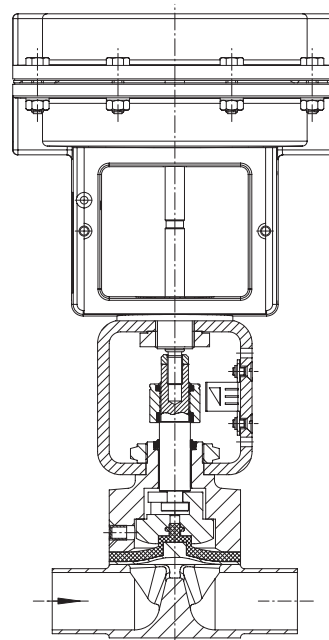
· Type 3345-7, DN 25 with Type 3277 Actuator
